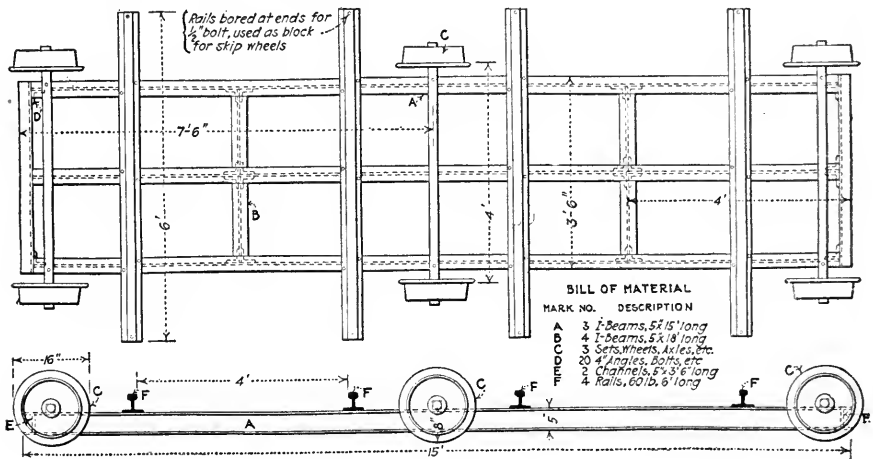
DESIGN OF THE DOUBLE CARRIAGE.
